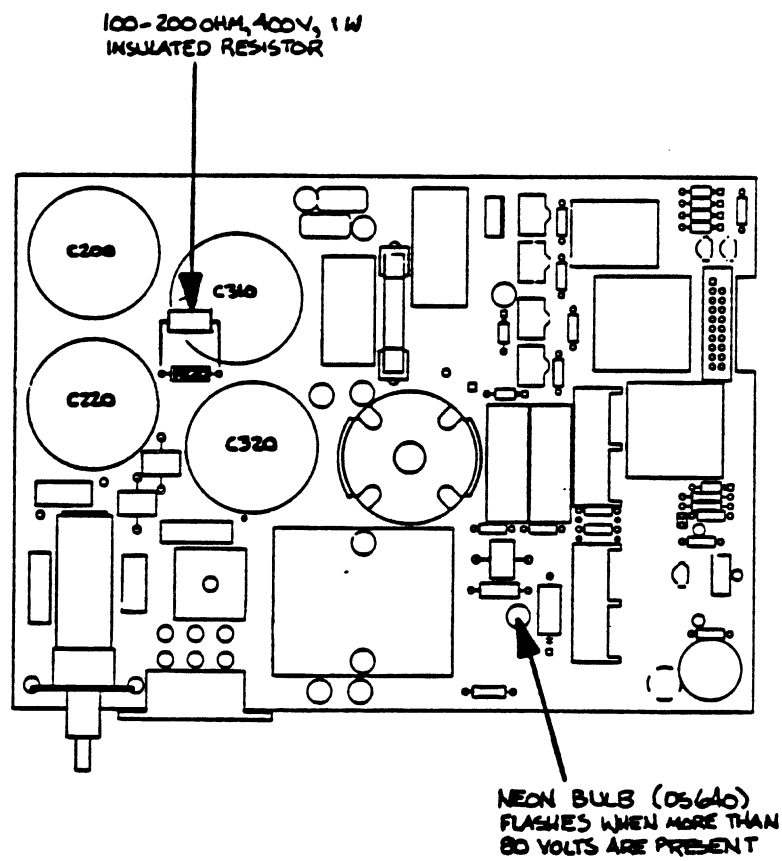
Manually discharging the line storage capacitors on the A2A1 Line Inverter Board.
